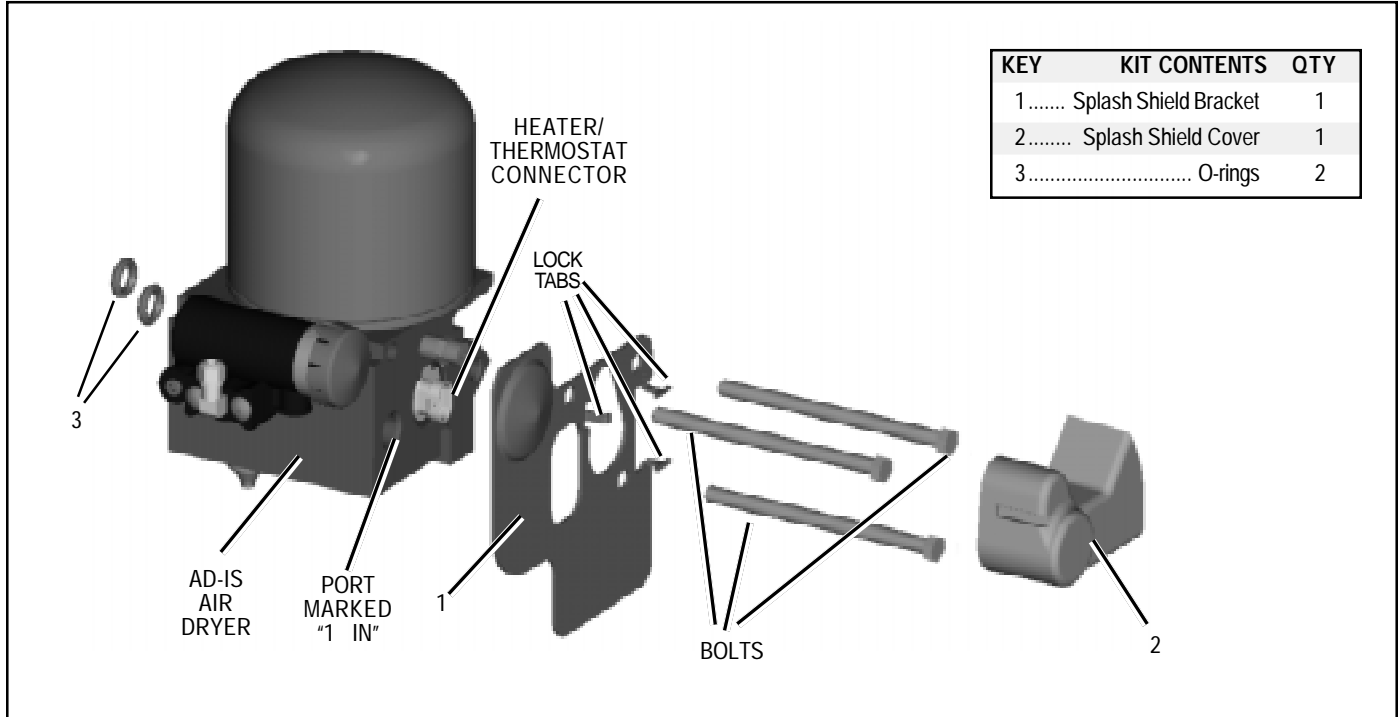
SPLASH SHIELD EXPLODED VIEW
